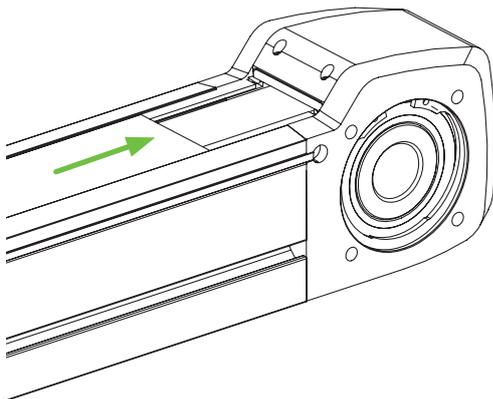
Installing the cover strip in the cover strip clamp on the HM-B
